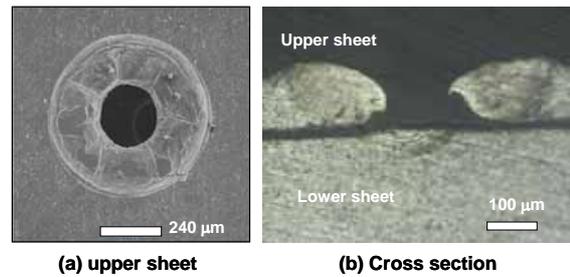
Top surface of upper sheet and cross section of a non-bonded A3003 weld with a hole.
